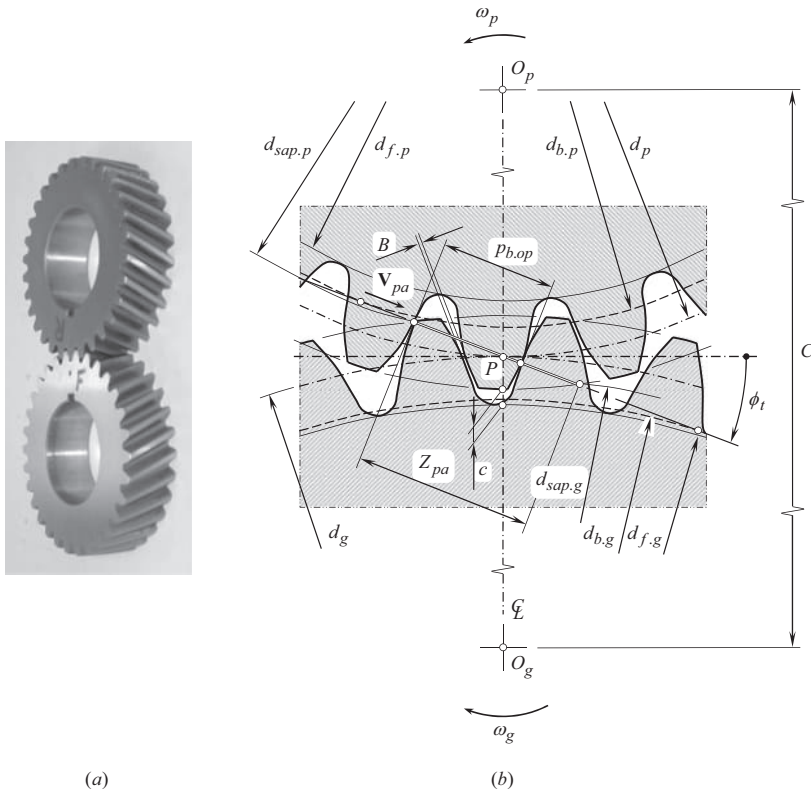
Close-up view (a), and the main design parameters (b) of external involute gear pair.
